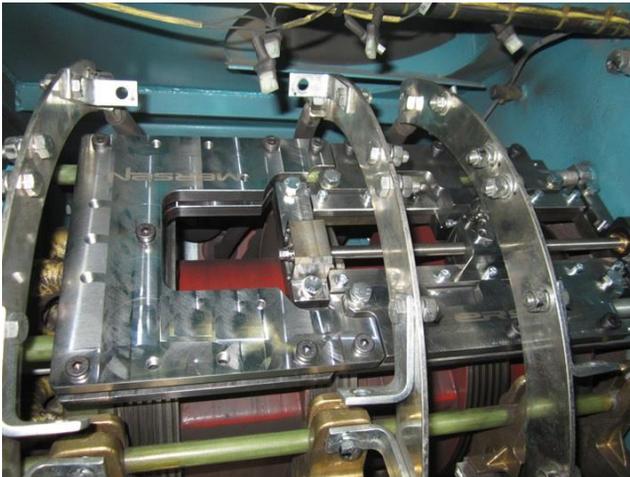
Mersen portable lathe in place inside the slip ring cabinet
